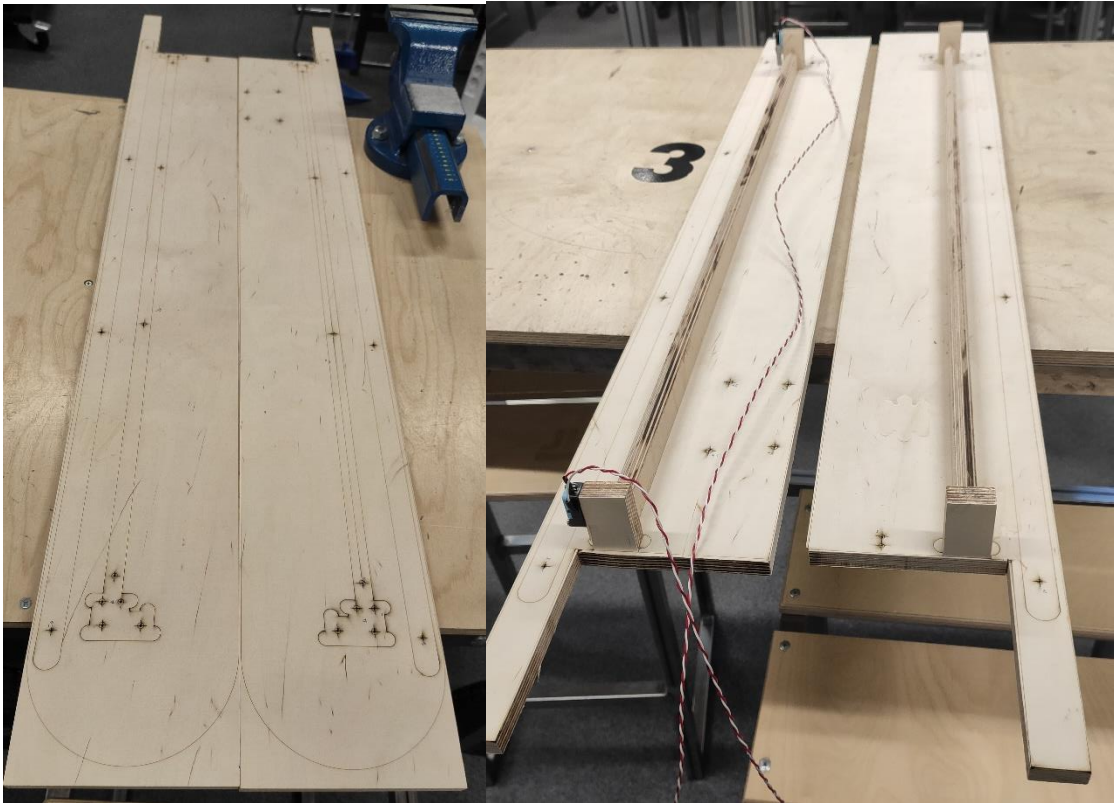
Tower assembly walls a) unfinished blanks laser marked and partly cut b) finished, rails and end stop switches attached
